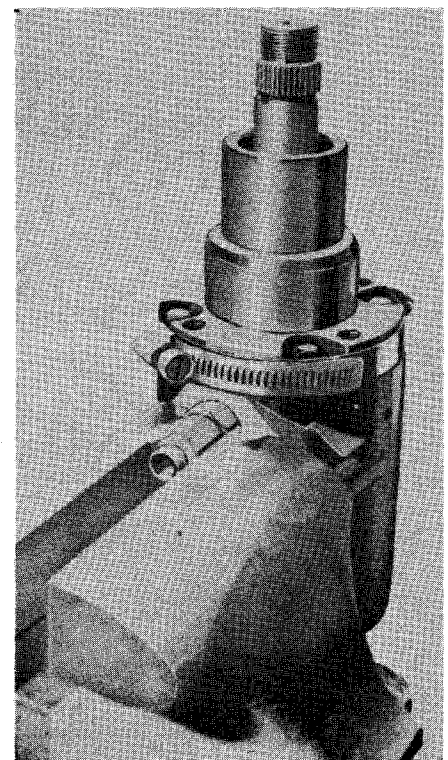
A large hose clamp may be used as shown to align cover to valve body before tightening cap screws.
